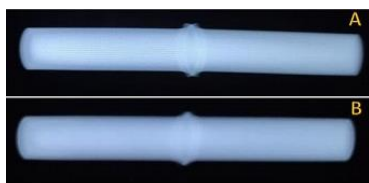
X-ray inspection of fifth piece side A, side B.
